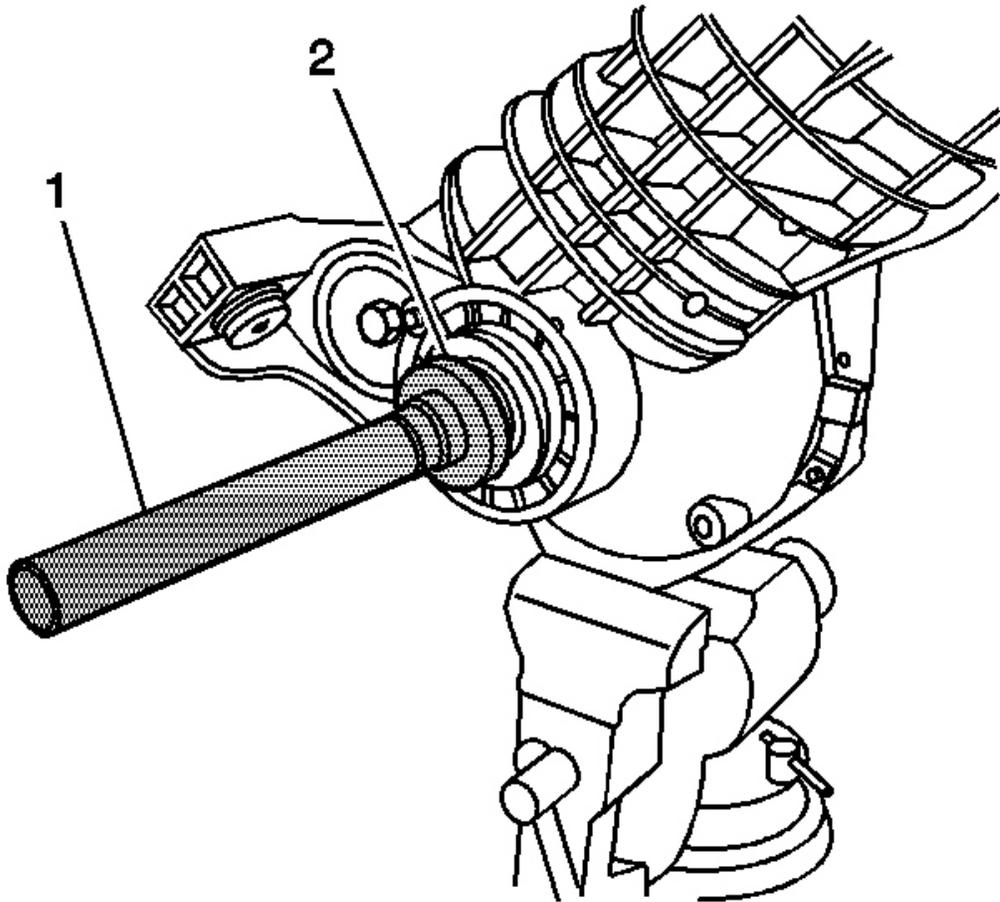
Installing Left Side Axle Shaft Bearing Using J 36609 & J 8092
